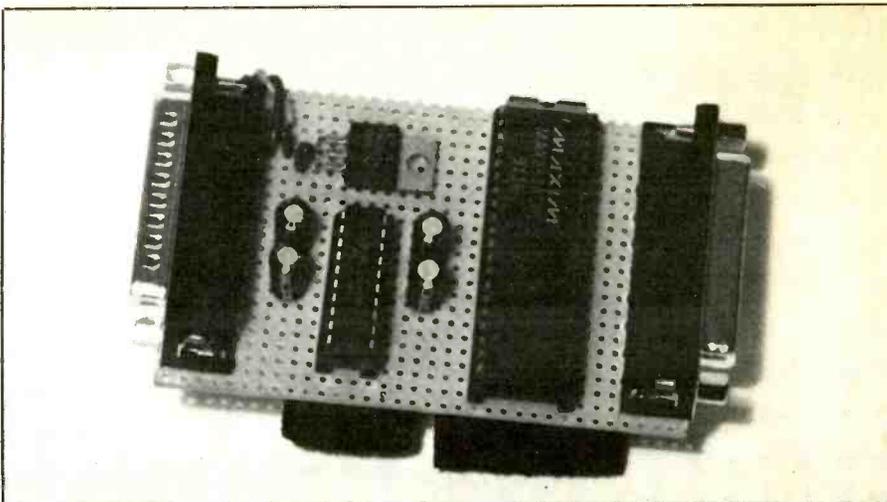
Author's prototype was wired on perforated board using the Wire Wrap technique. DB-25 connectors mount at opposite ends of the board.
